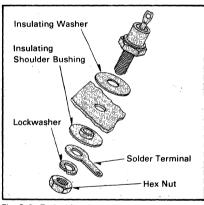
C: Typical Insulating Hardware Kit Assembly.
